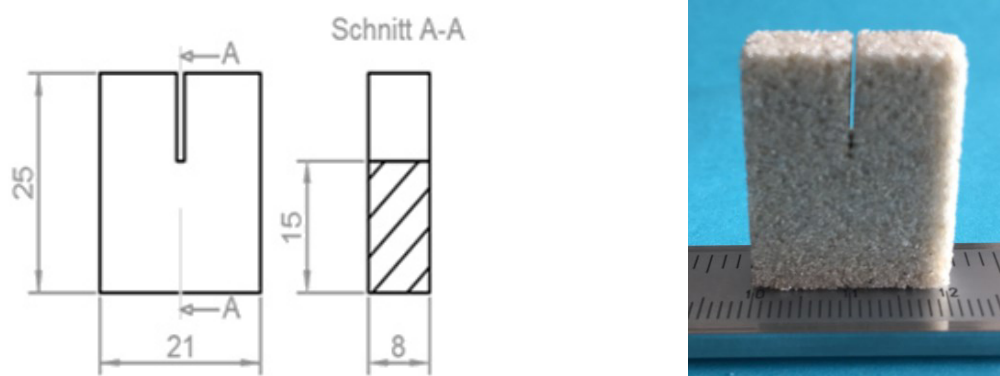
Drawing for miniaturized wedge split test specimen [173] and a first realized test core.
